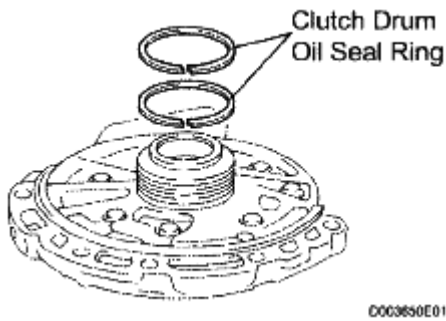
Identifying Clutch Drum Oil Seal Rings
